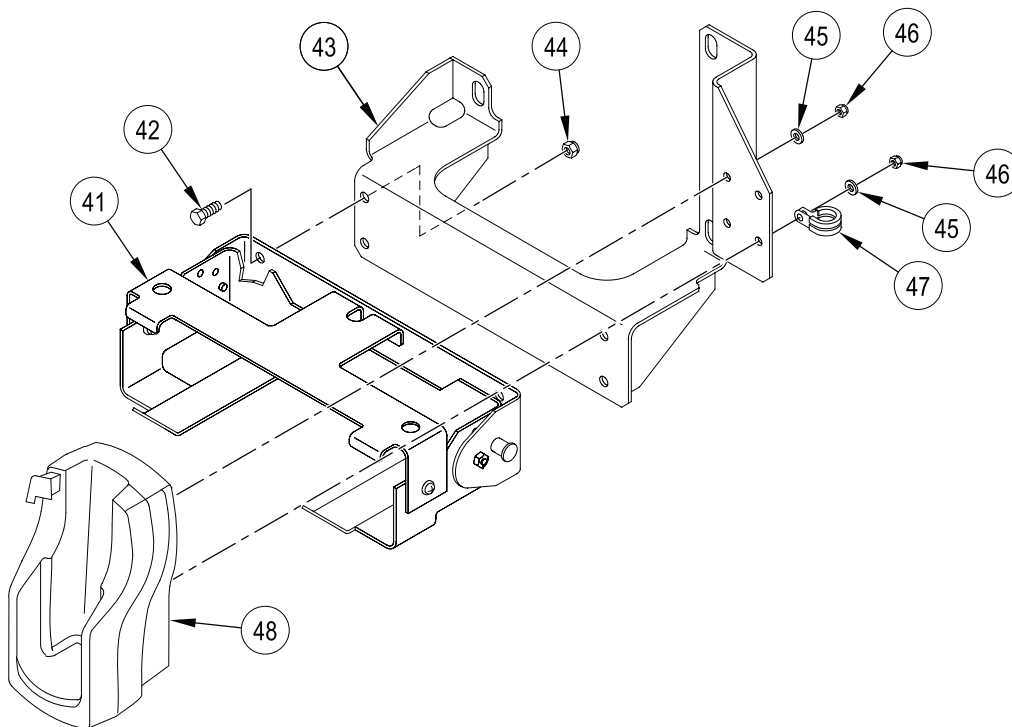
RCU/PDA Bracket Assembly (M1068A3 Only)
